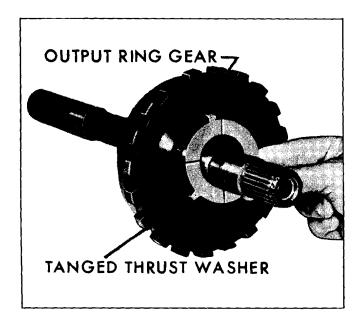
G-149 Installing Output Ring Gear Thrust Washer
